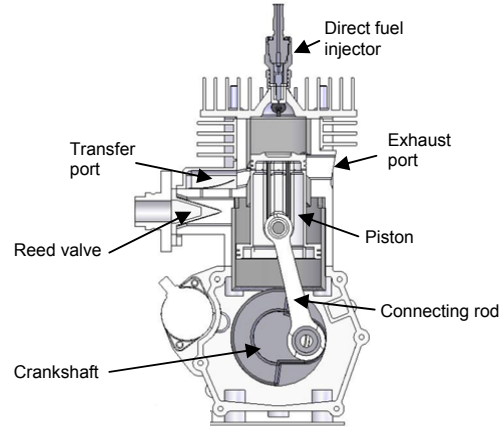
Prototype two-stroke step piston gasoline engine cross-section
